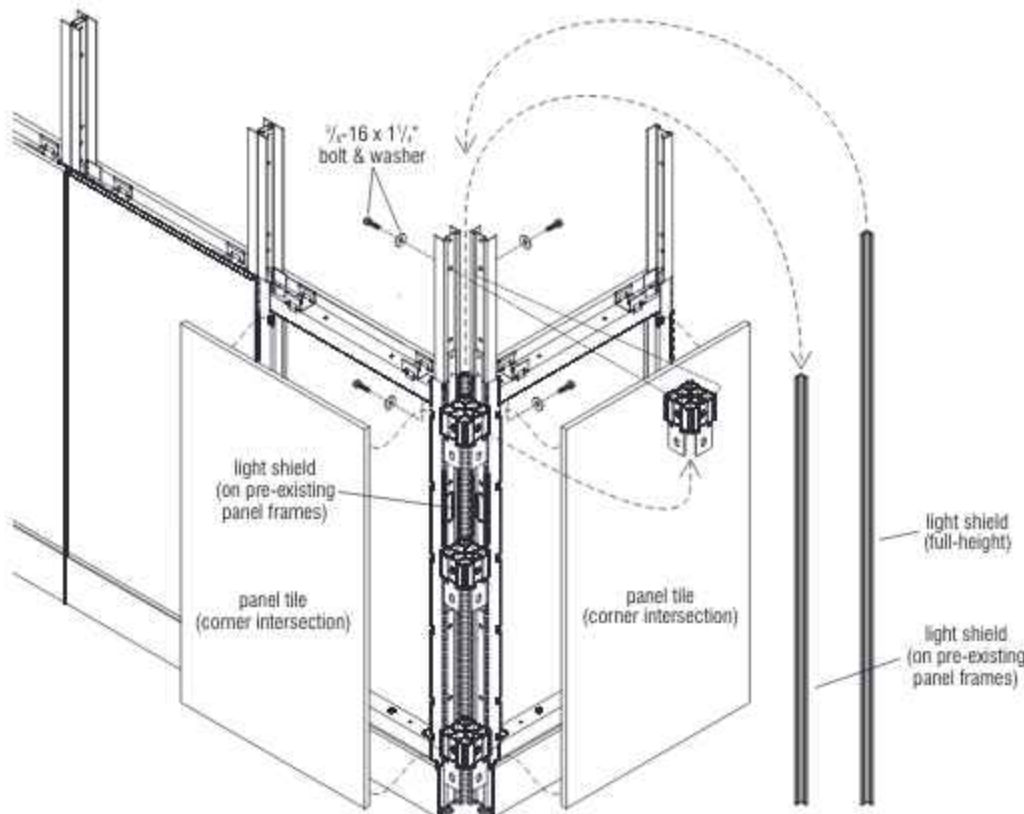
Stacking Sections (aluminum frame) - Full-Height Intersection
